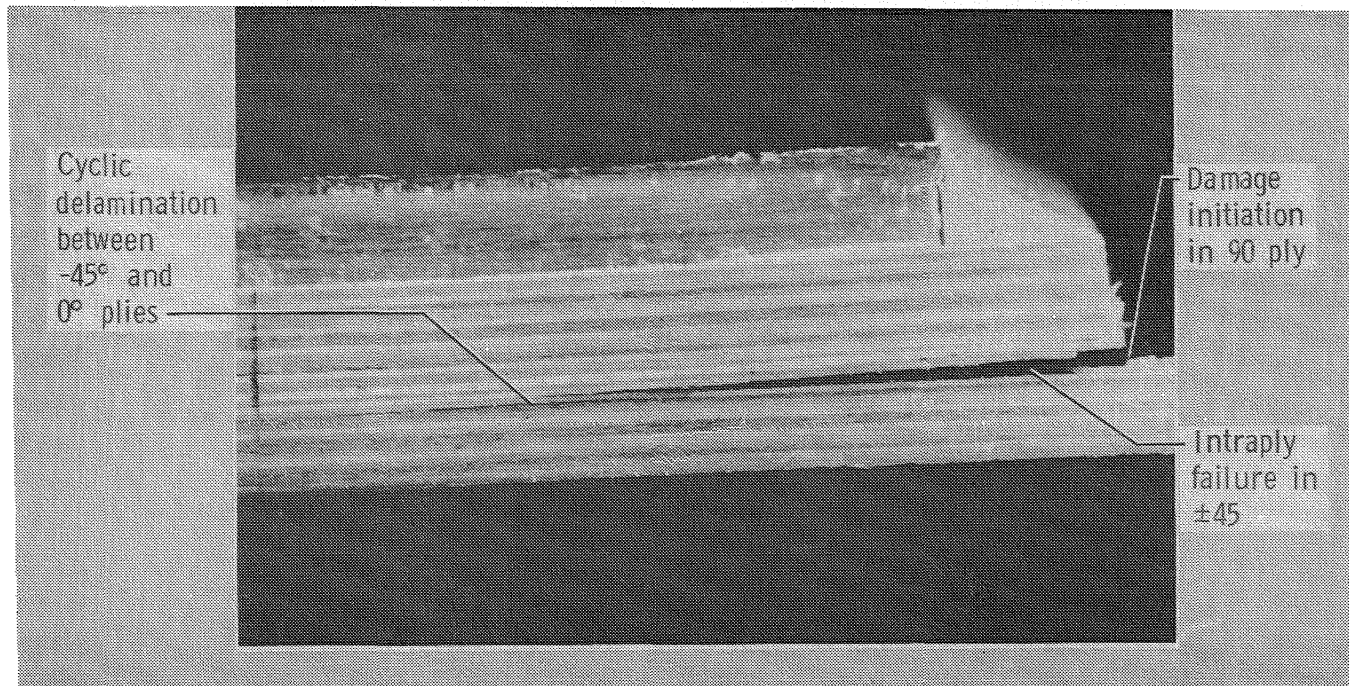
Edge view of fatigue damage in the FM-300 adhesive CLS specimen with  $[90/\pm 45/0]_{2s}$  layup.
